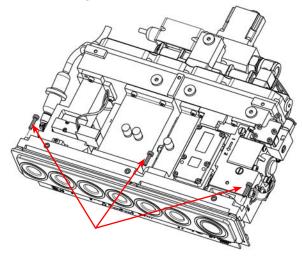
Rear Screws Securing Front Cover to Manifold Assembly
